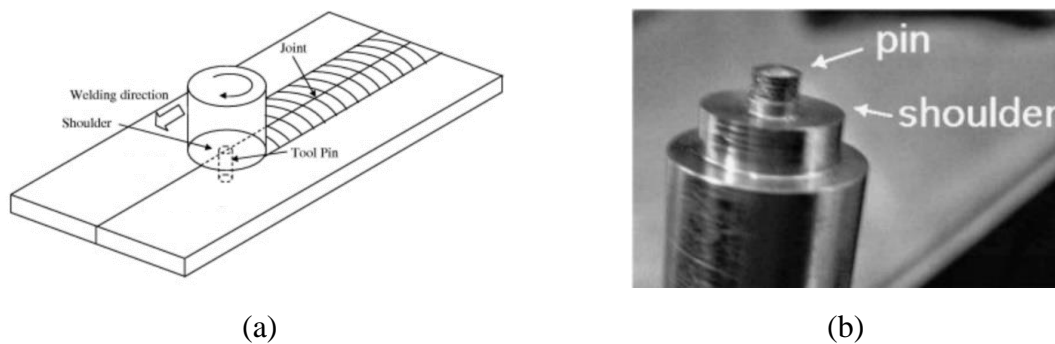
(a) Schematic illustration of the FSW process with conventional tool. (b) Real image of a conventional tool used on FSW [16].
